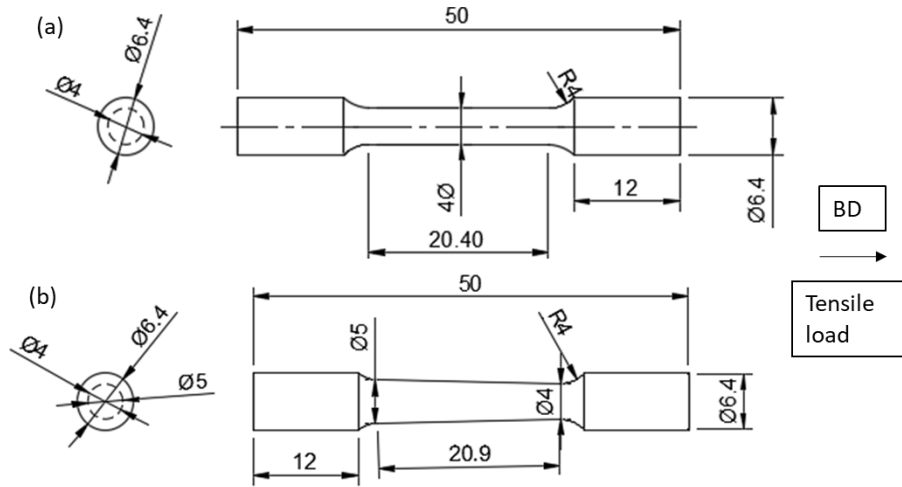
Technical drawing of the (a) standard and (b) tapered geometry used for the tensile tests on specimens printed with 316L. All dimensions are given in millimetres.
